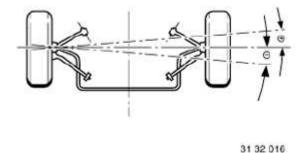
Identifying Wheel Offset Angle Courtesy of BMW OF NORTH AMERICA, INC.
